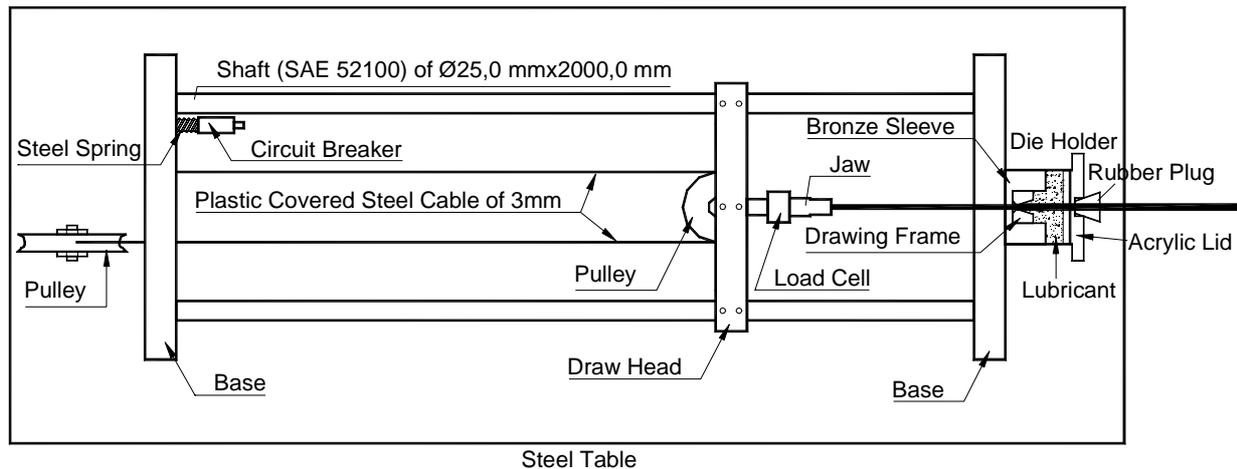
Schematic diagram showing plan view of the present wire drawing machine.
